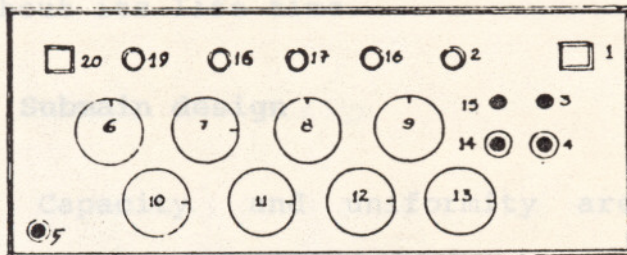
(b) CONTROL PANEL-FRONT VIEW
